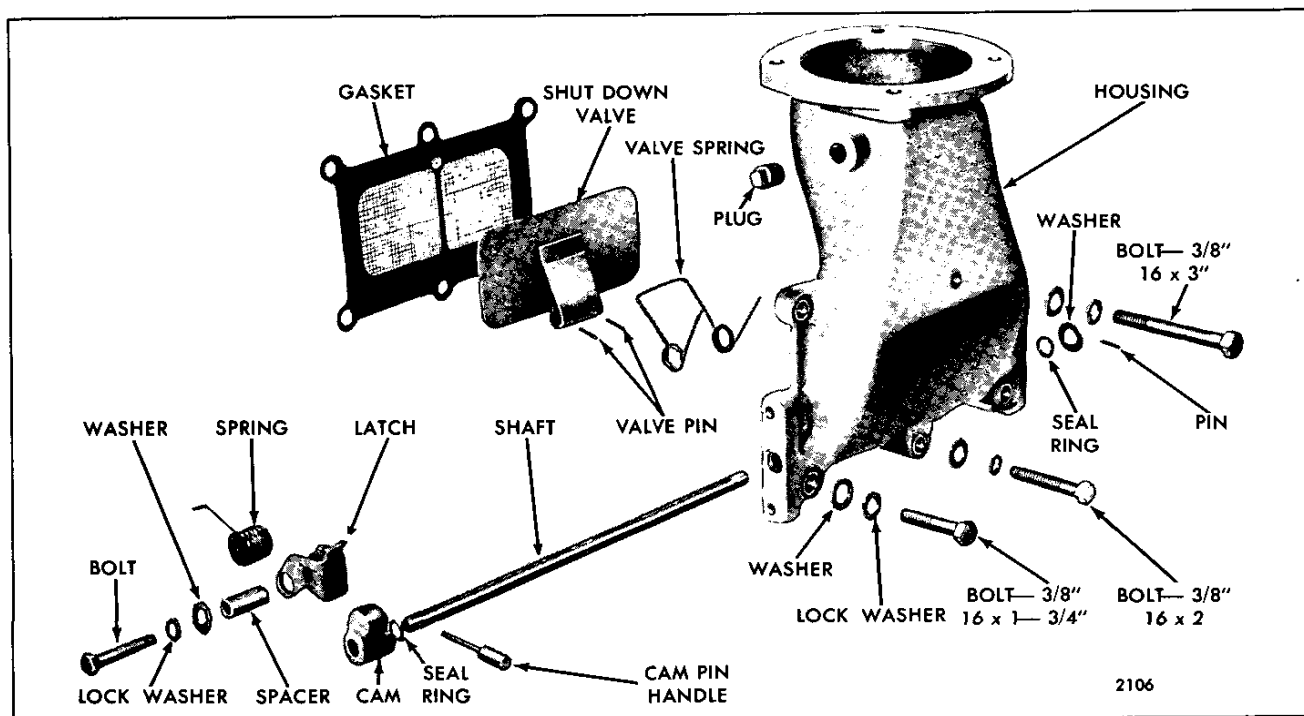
Typical In-Line Engine Air Shutdown Housing Details and Relative Location of Parts
